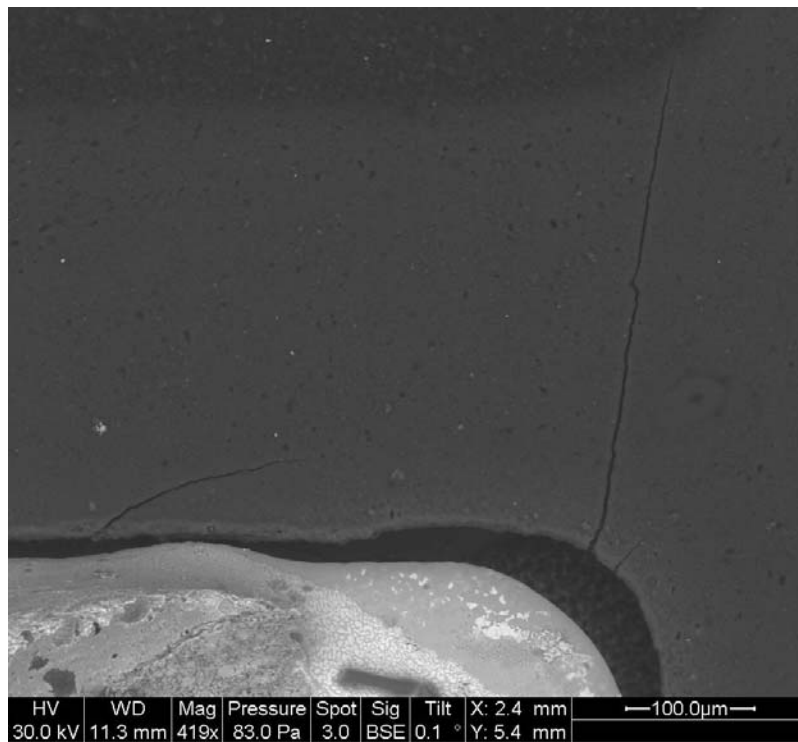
Board cracking at solder pad, 1206 flex termination MLCC.
